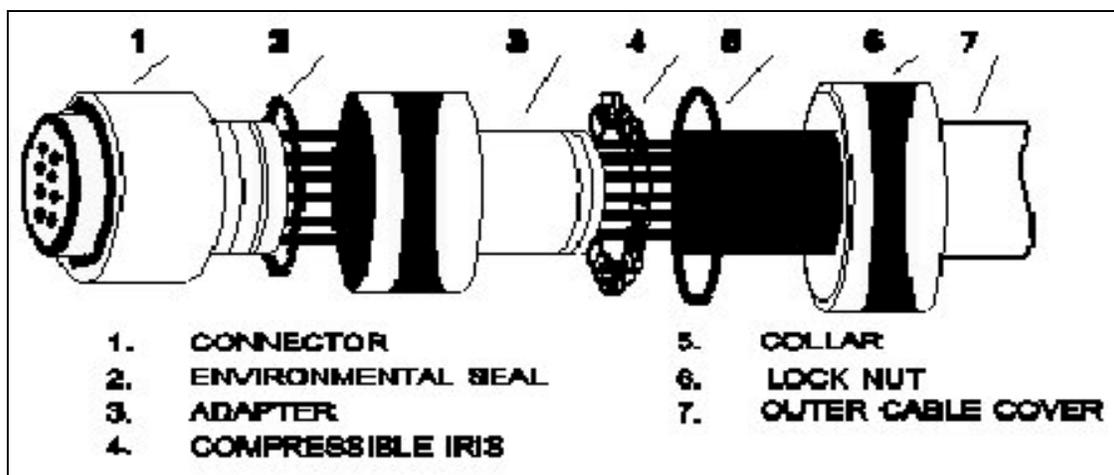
Standard Shielded Connector and Cable Assembly
